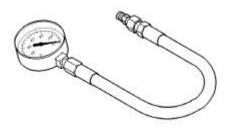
GAUGE, PRESSURE - C-3292A Courtesy of CHRYSLER LLC
